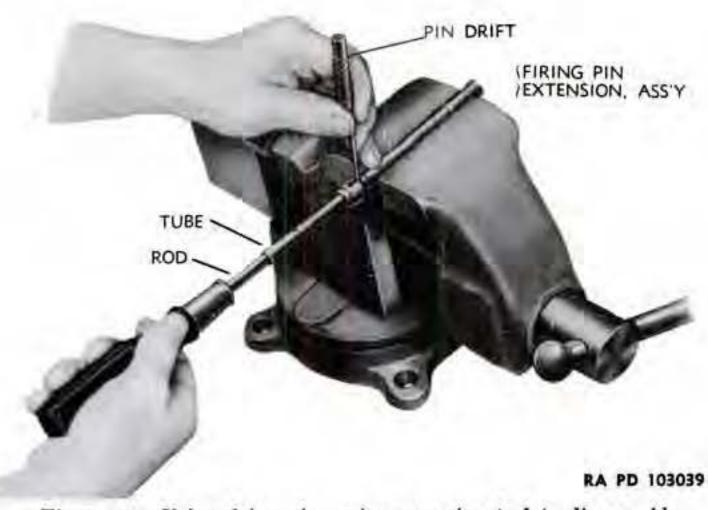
Using firing pin spring removing tool to disassemble firing pin extension assembly.
